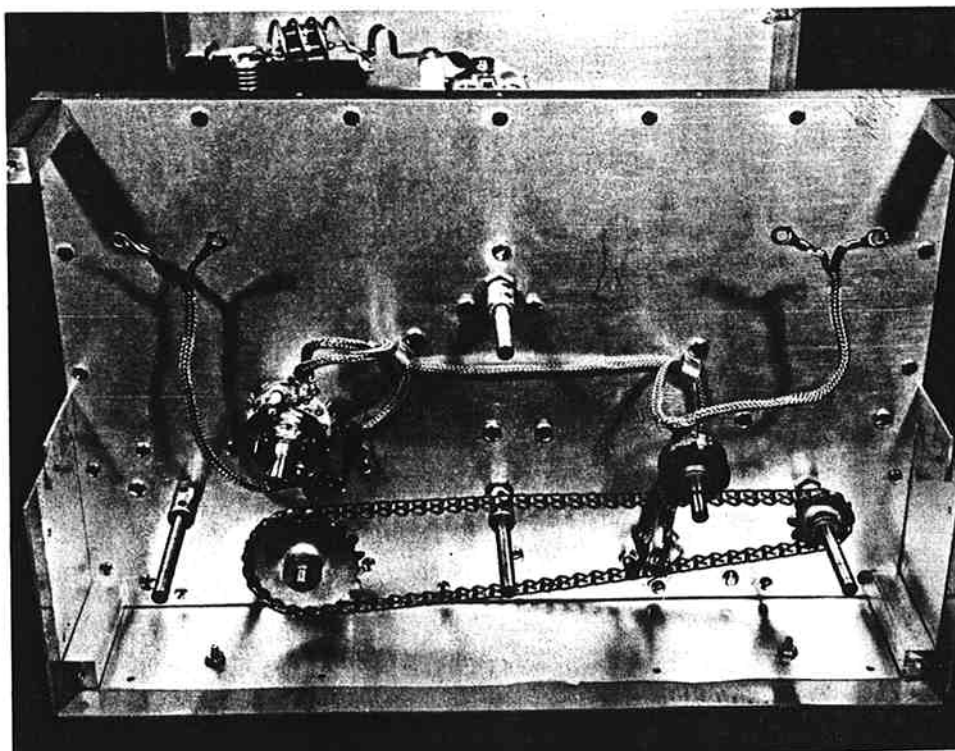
Meter wiring and chain drive behind panel. Cathode tank (left) and plate turret (right) are ganged, using American Stock Gear #C-10 sprocket (10 teeth, 1.125" diam.) left, and American Stock Gear #C-20 sprocket (20 teeth, 2.030" diam.) right. "Ladder" chain drive is American Stock Gear #18/42.
